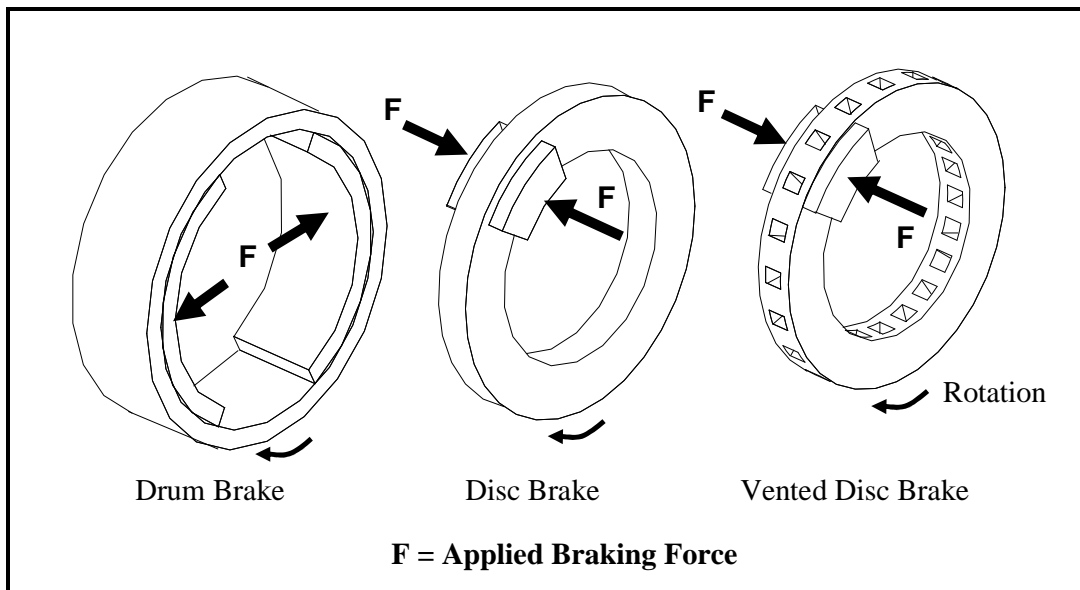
Schematic View of Drum and Disc Brakes, adapted from Baker (1986)
